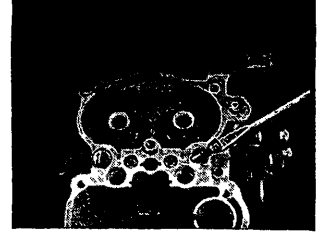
Install pump jets and pump jet plugs. Make certain jets are clear of all restriction and seat properly. No washers are used between plugs. Check to see that outside bleed hole in casting is not restricted
